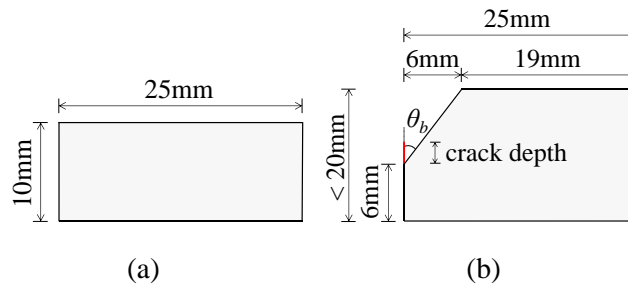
Backing bar geometry: (a) conventional detail; and (b) beveled detail.
